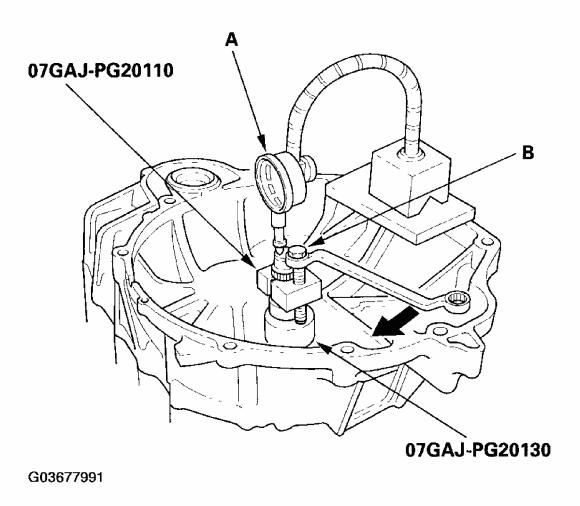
Measuring Mainshaft Thrust Clearance Courtesy of AMERICAN HONDA MOTOR CO., INC.
